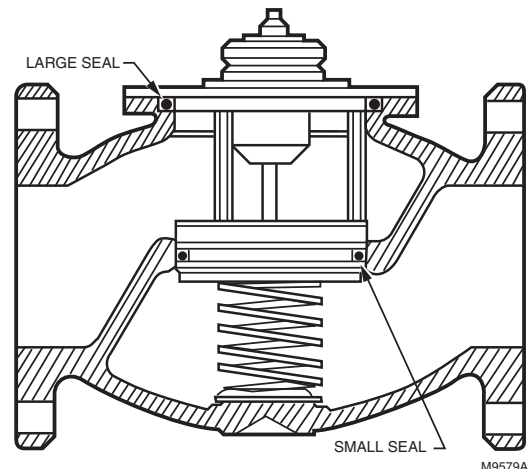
Proper positions of valve and bonnet seals in 4 in. valves.
